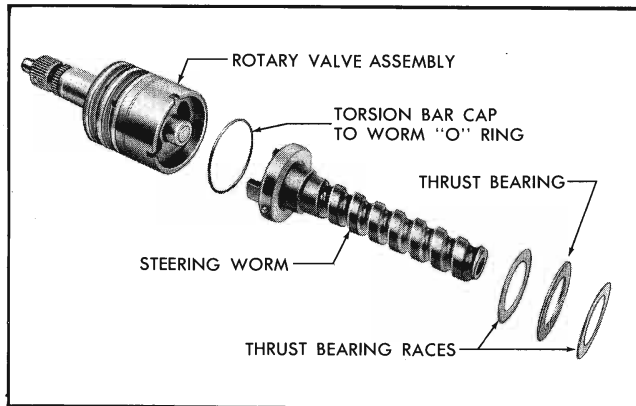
A-32 Worm Shaft and Rotary Valve—Exploded View
